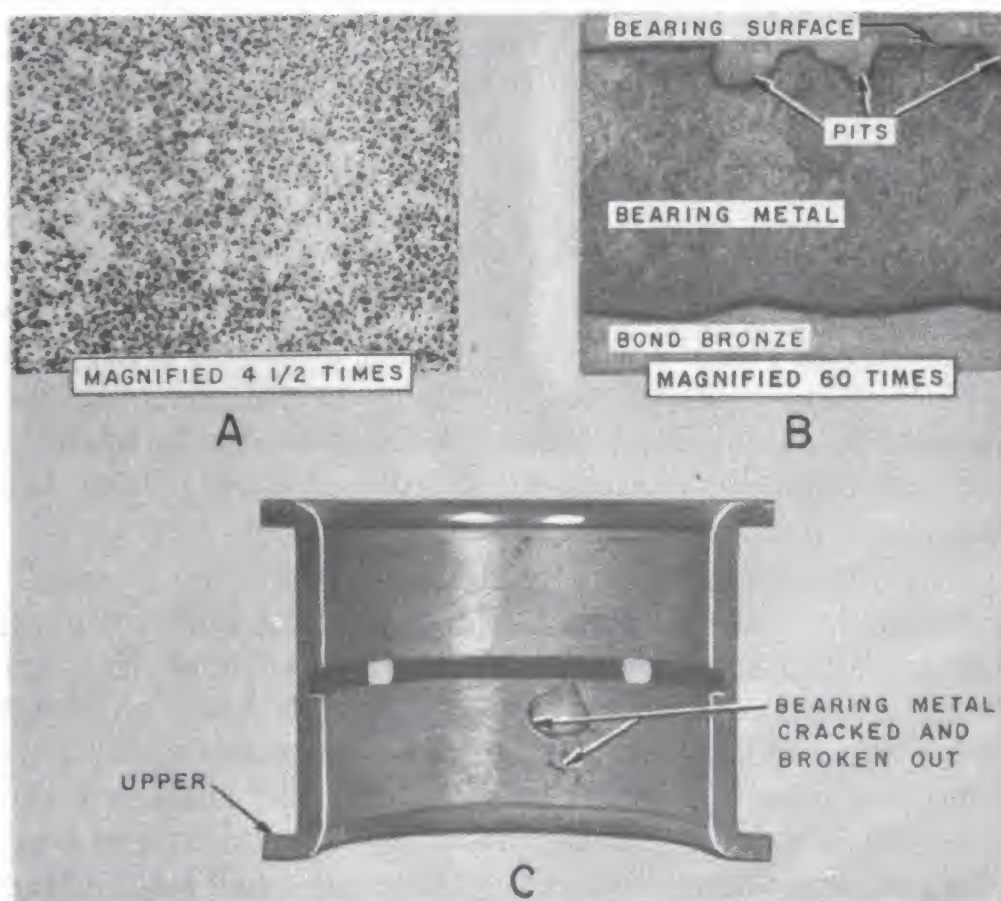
Bearing failures due to corrosion and an inadequate bond.
